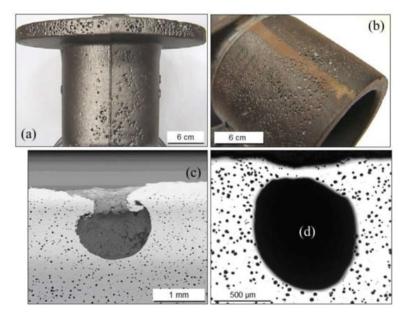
Pinholes found in the skin (a) and after machining (b). Deformed aspect of an open pinhole with irregular graphite and Mn-S layer in its internal surface after shot blasting (c). Internal pinhole close to the skin of the casting (d).
